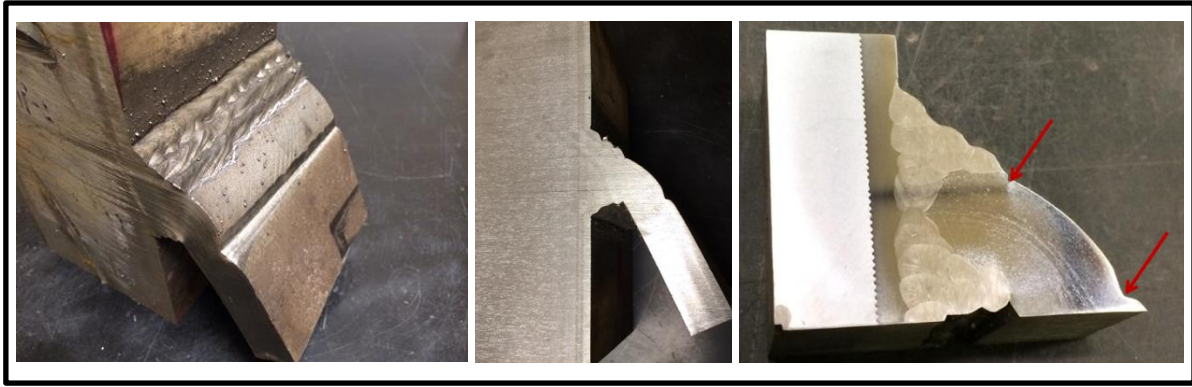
Cantilever Test Section Examination – Severe deformation of attachment and cracking observed in the attachment welds, but no clad separation at EXW interface.
